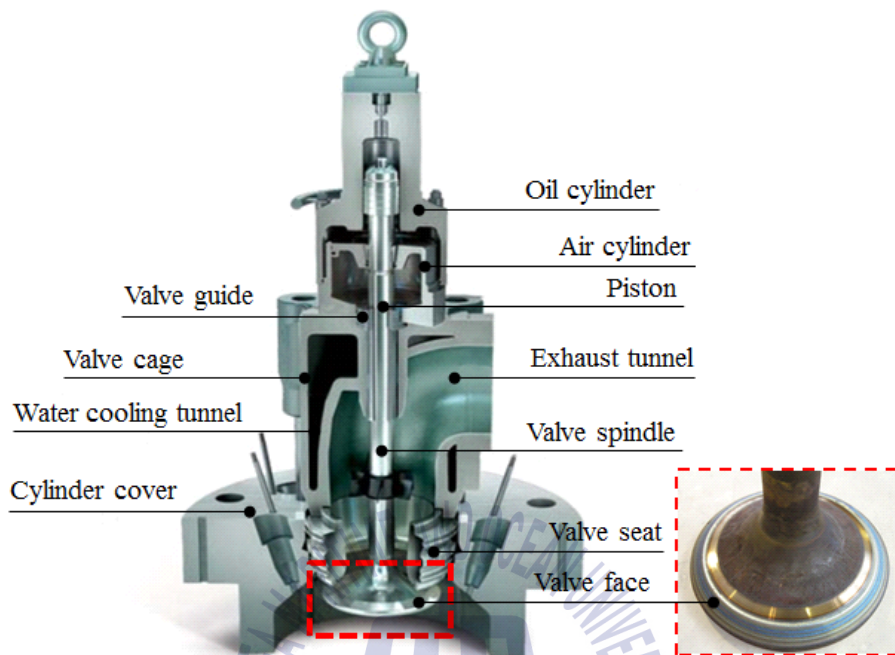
Photo of exhaust valve for marine diesel engine
